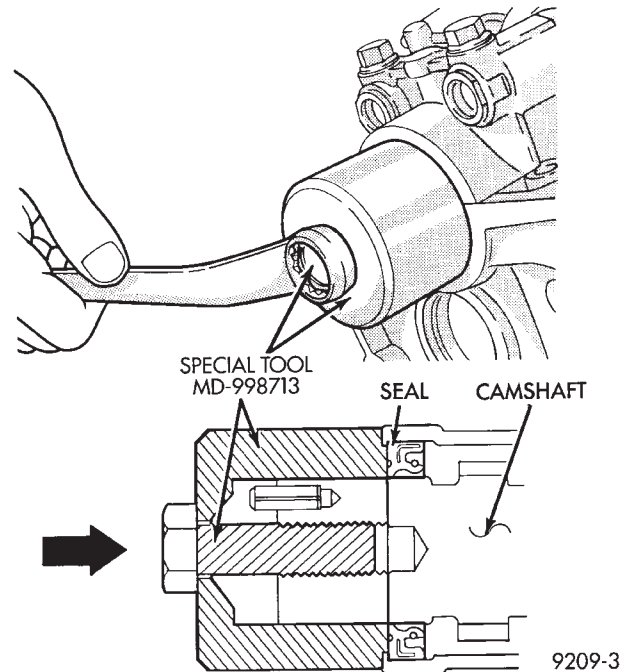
Right Cylinder Head—Installing Camshaft Oil Seal
